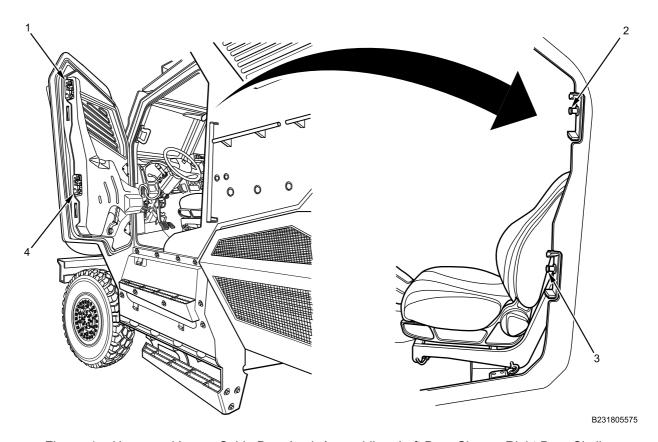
Upper and Lower Cabin Door Lock Assemblies. Left Door Shown; Right Door Similar.
